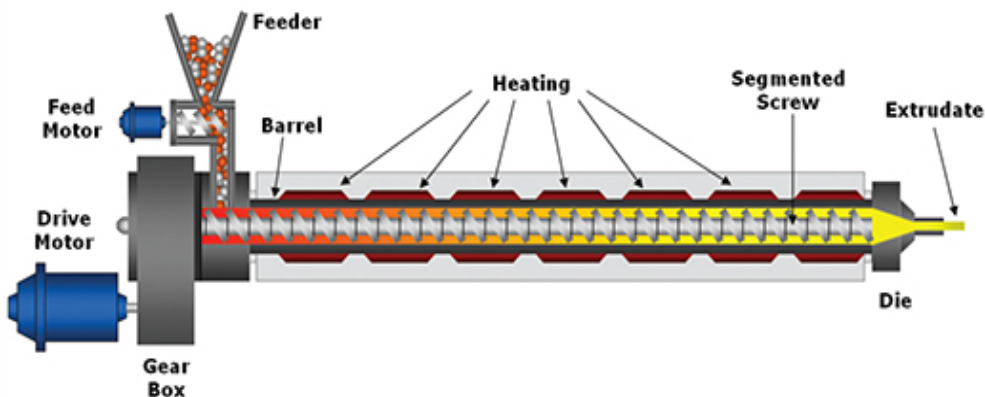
Hot melt extrusion technique in 3D printing⁸³
